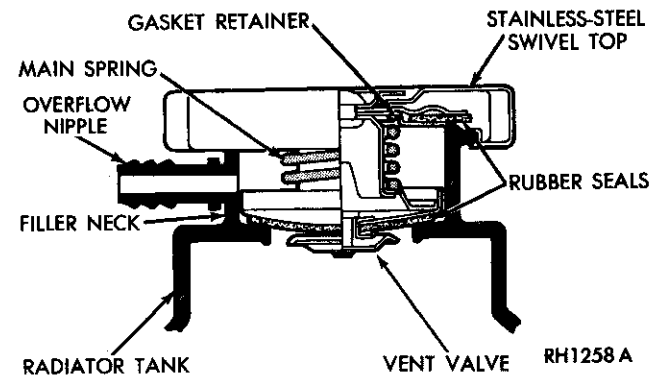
Radiator Pressure Cap and Filler Neck—Typical
